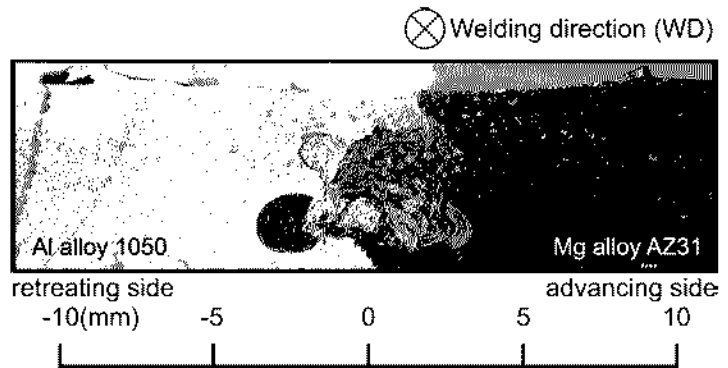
Transverse cross section perpendicular to the welding direction.
